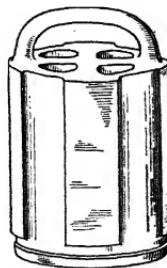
Pilot tool for entering liners in cylinder blocks.
